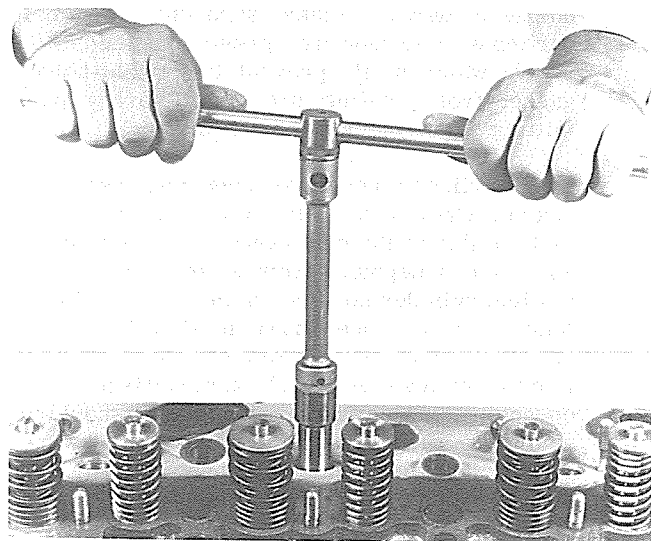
Lapping Fuel Injection Nozzle Valve Body
